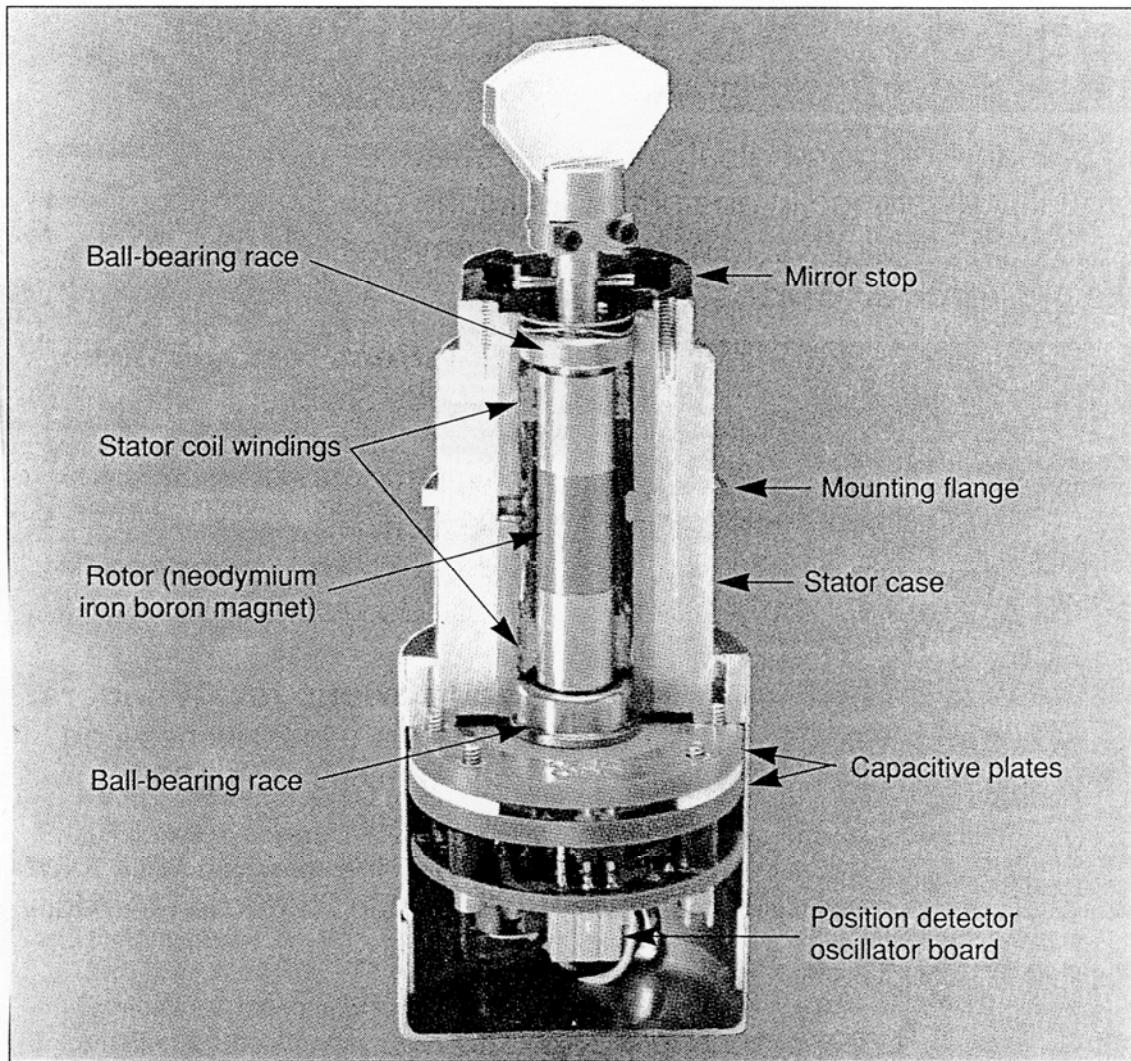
Cross section of a moving-magnet galvanometric scanner shows the magnet rotor driven by the stator coil.
